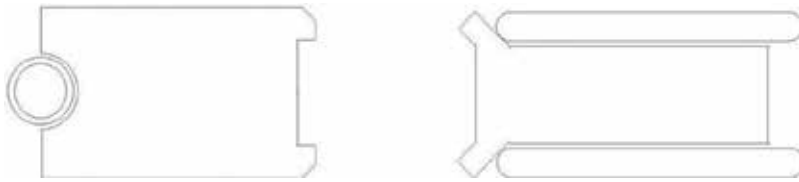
Oil control ring: two-piece oil control ring (left), three-piece oil control ring (right).
